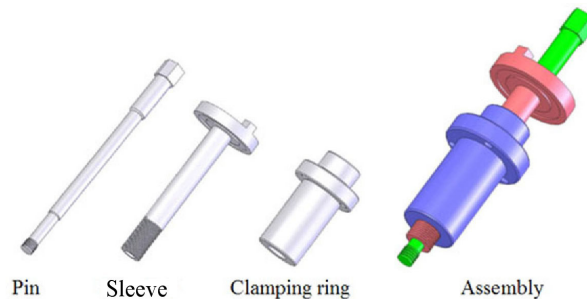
Schematic illustration of the three-piece tool system in FSpW: clamping ring, sleeve and pin.
